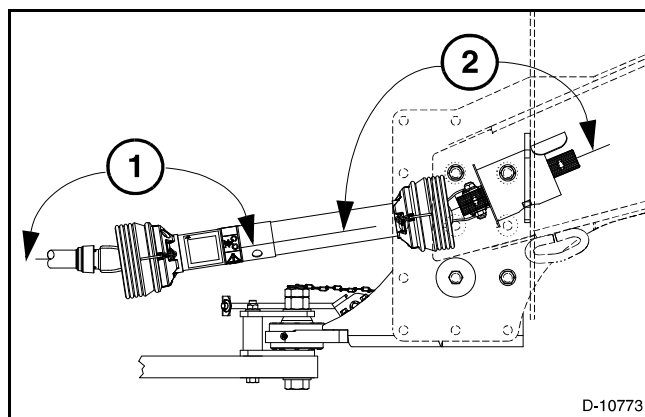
Install the drive shaft shields (1) on the tongue. If equipped install and adjust the PTO sensor (2).
